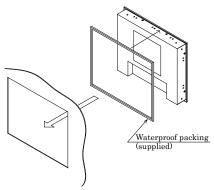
Attaching the Attachment Fittings (PT-955SHX-DC6xxx)
